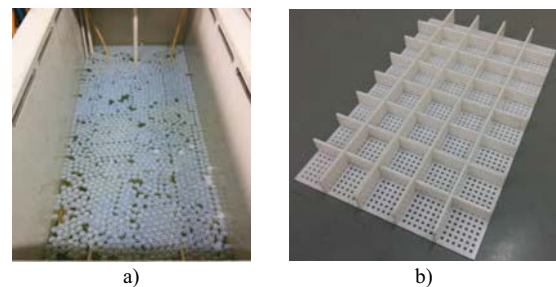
a) Tub used on experimental tests and b) tray to support the TiAl test castings.
